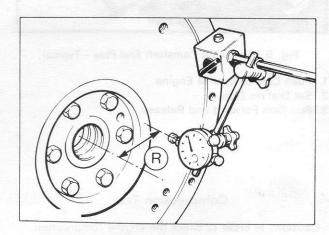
Checking Flywheel Run-Out R = 140 mm (5,50 in.)
